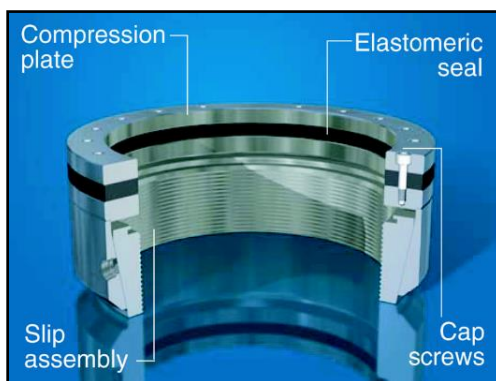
Illustration of a mechanical-set slip-and-seal assembly in sub-mudline liner hanger assembly (Speer 2006)
